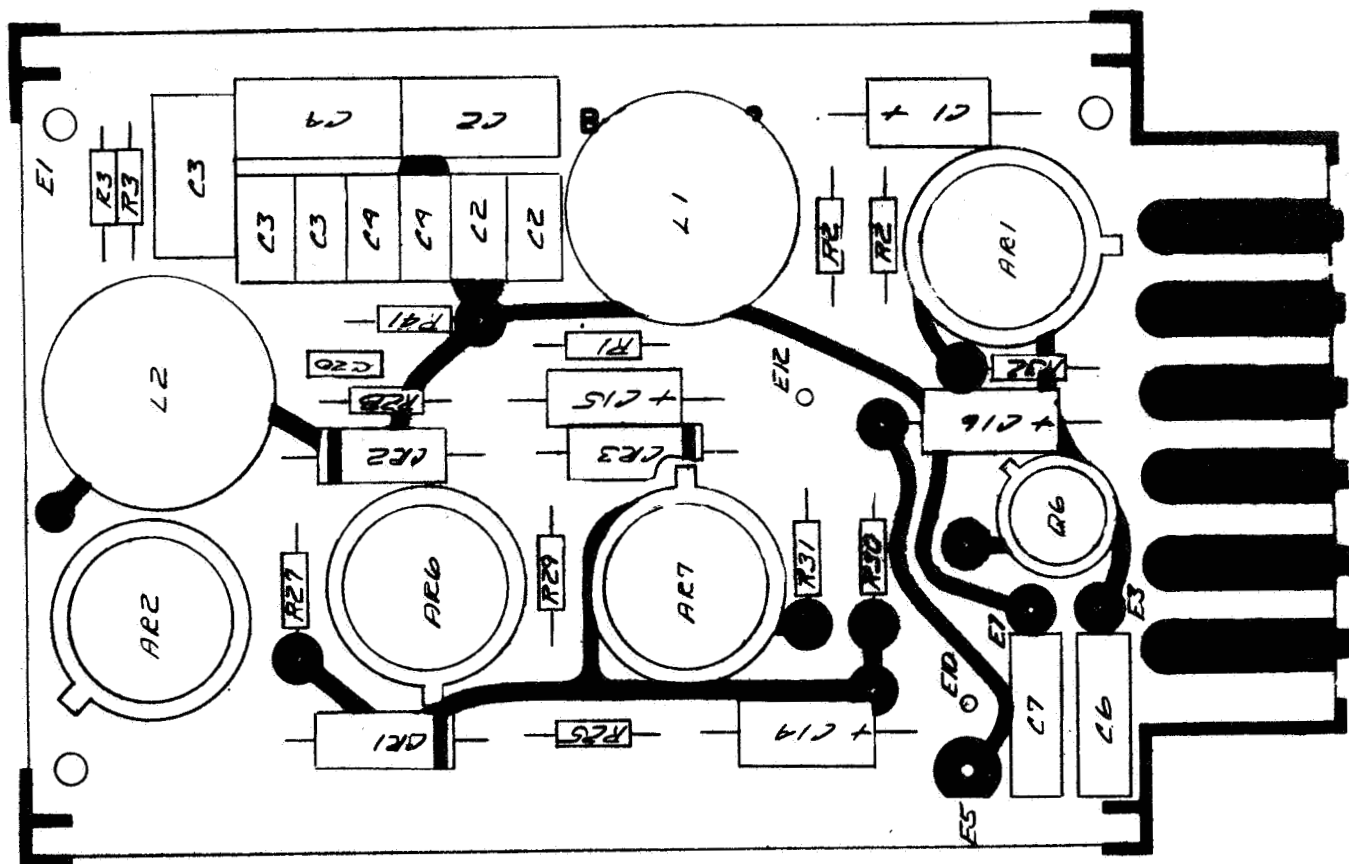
(D-60476) PRINTED CIRCUIT ASSEMBLY
